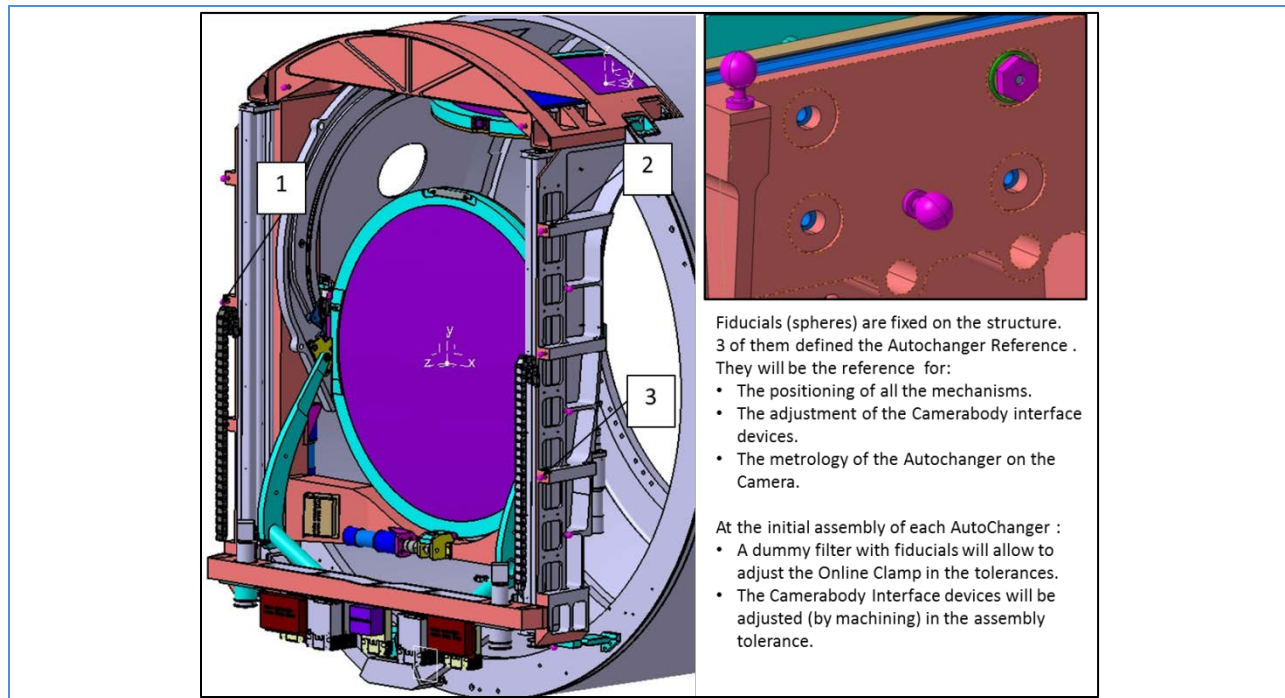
Definition of the Auto Changer reference for assembly and metrology
